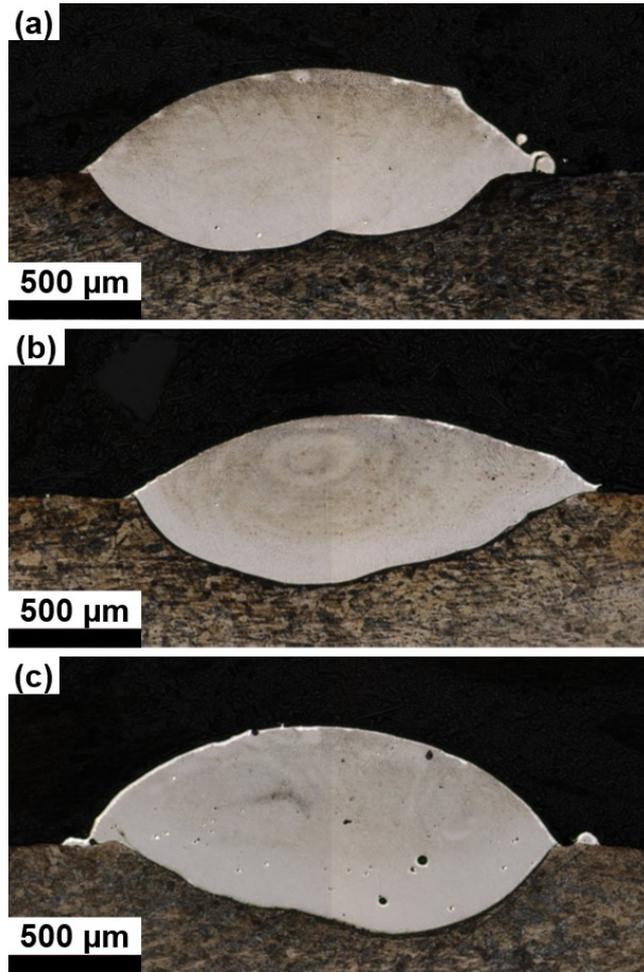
Optical micrographs of the cross-sectional views of the deposited beads for powder groups (a) A, (b) B, and (c) C.
